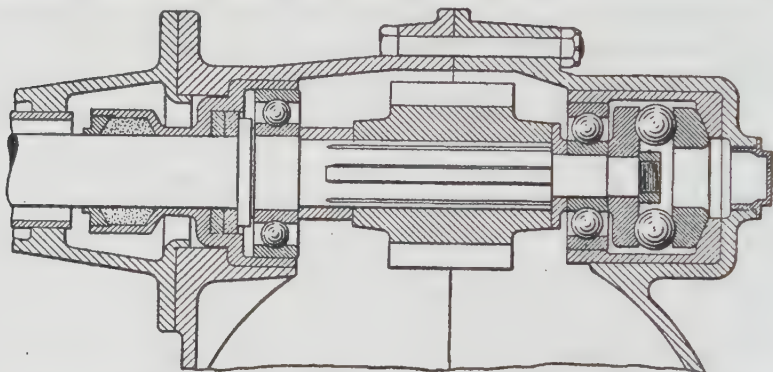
MOUNTING OF WORM WITH ONE PLAIN AND ONE BALL THRUST BEARING.
